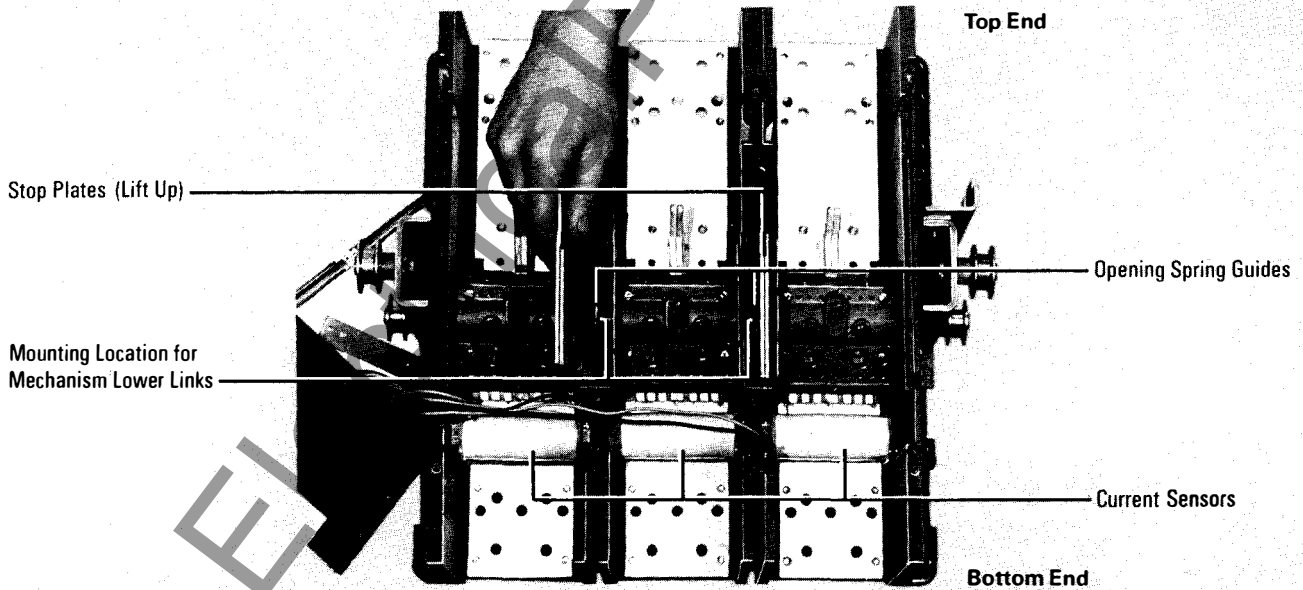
Removal of Stop Plates From 1600 Amp Breaker.
